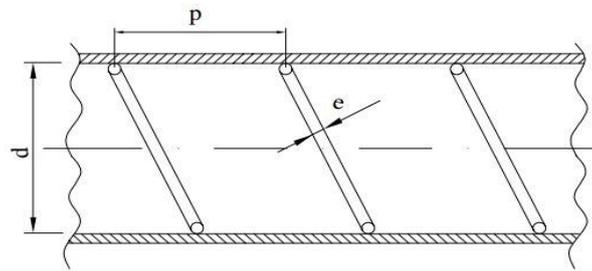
Wire coil insert fitted inside the smooth tube [3]
